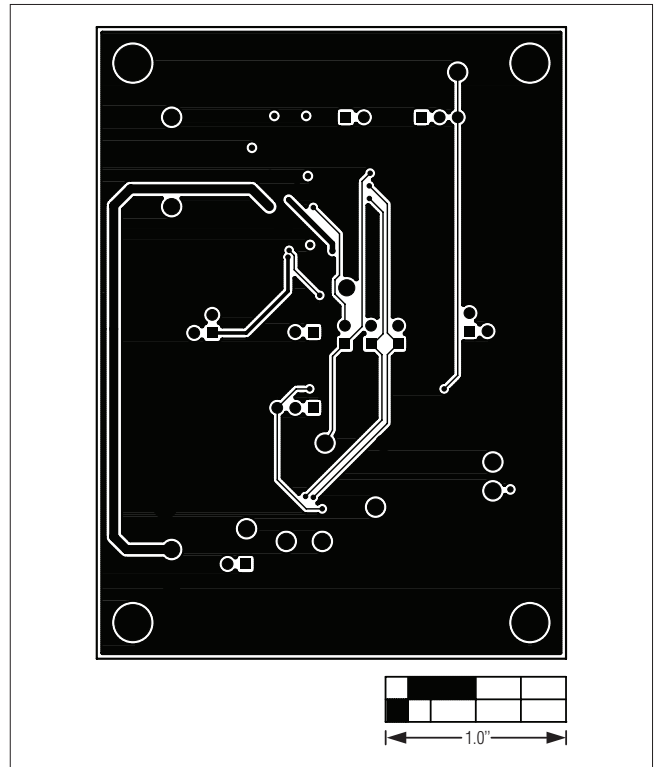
MAX14578A EV Kit PCB Layout—Solder Side
